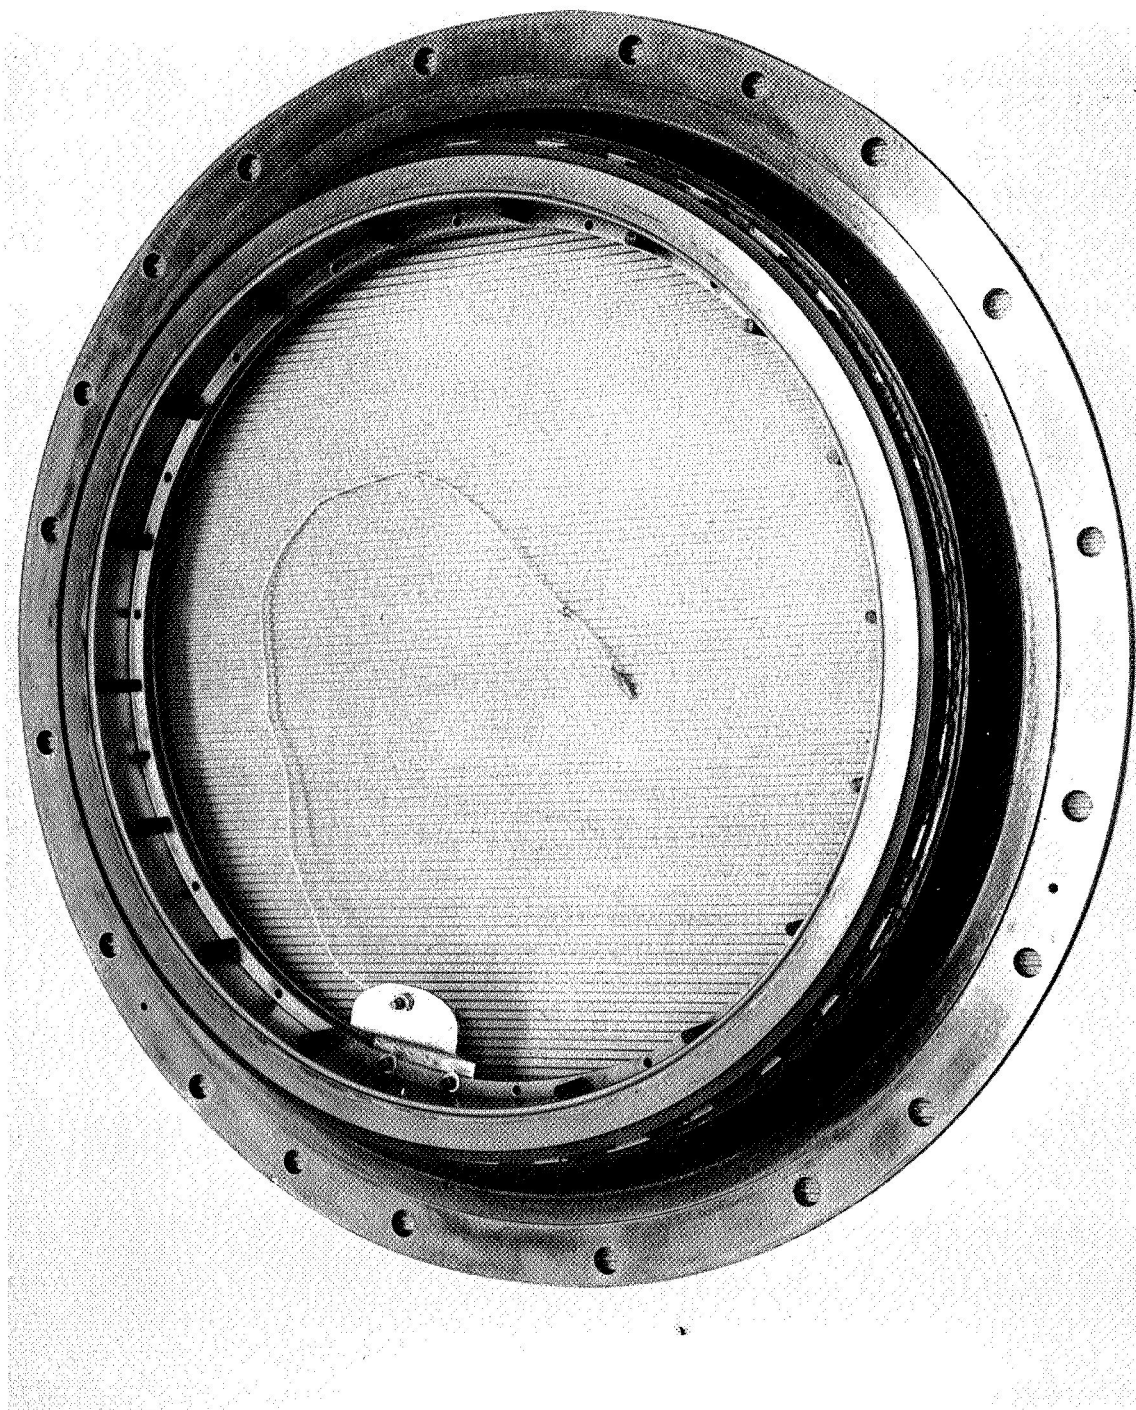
131 Seal Assembly Showing Plating Damage on Seal Face (C680313109)
